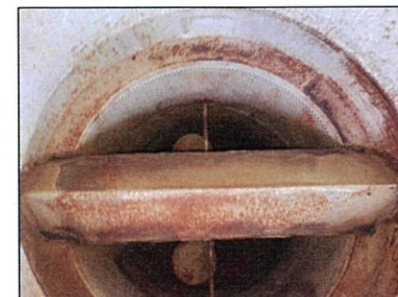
Visual inspection and remove scale on HP steam drum silencer
